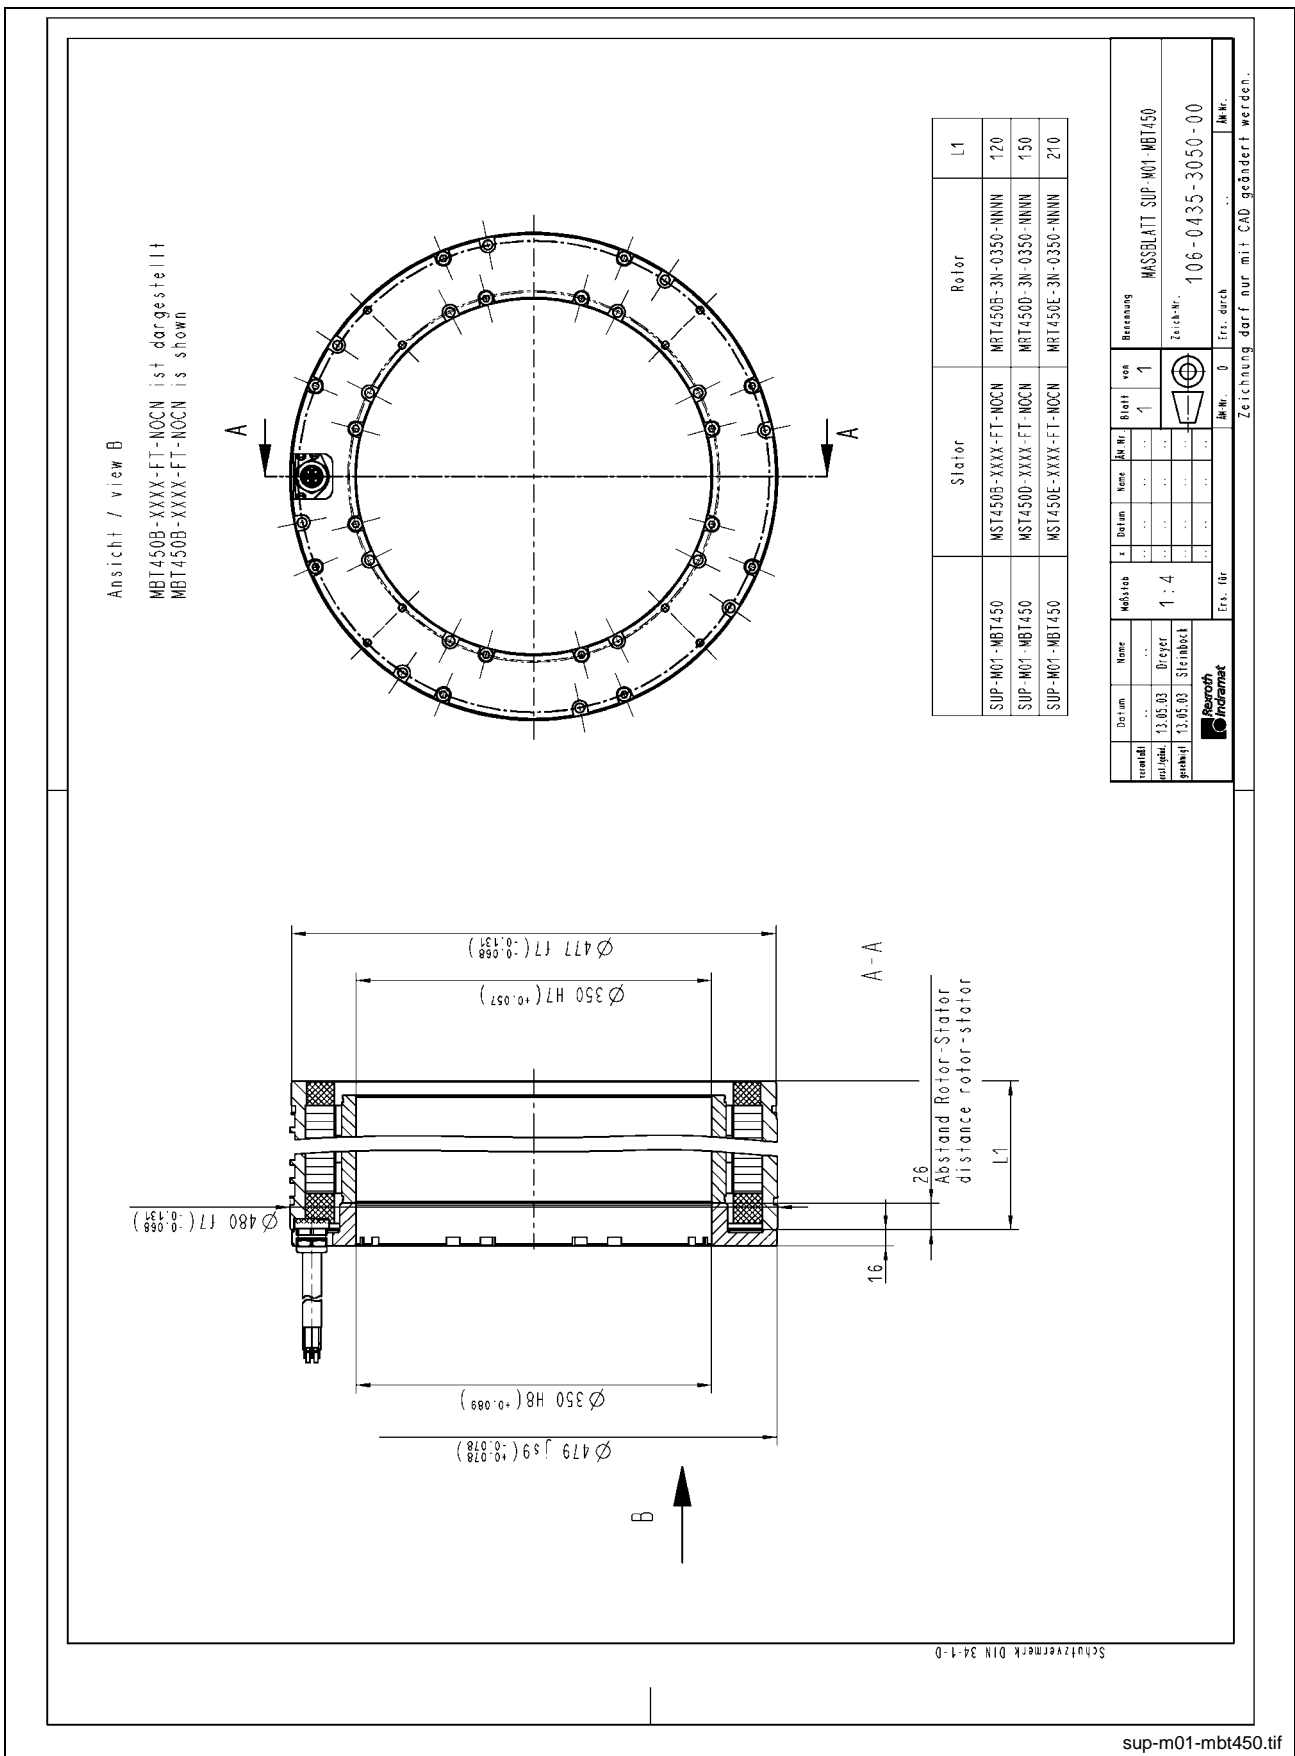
Dimension sheet for mounting ring in SUP-M01-MBT450
